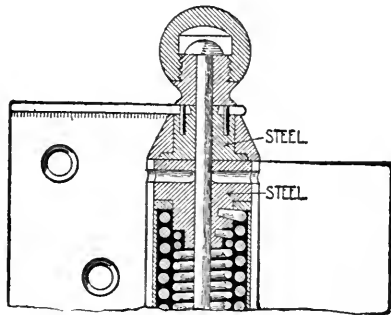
Section Through Cylinder of Bommer Hinge.
